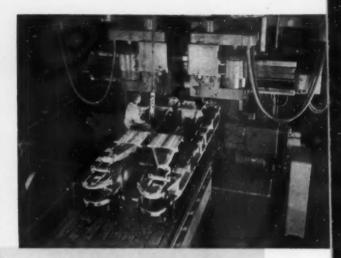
Modern double-spindle planer type mill has replaced two older machines at Harnischfeger Corp. High horsepower and double tables decrease machining time.
